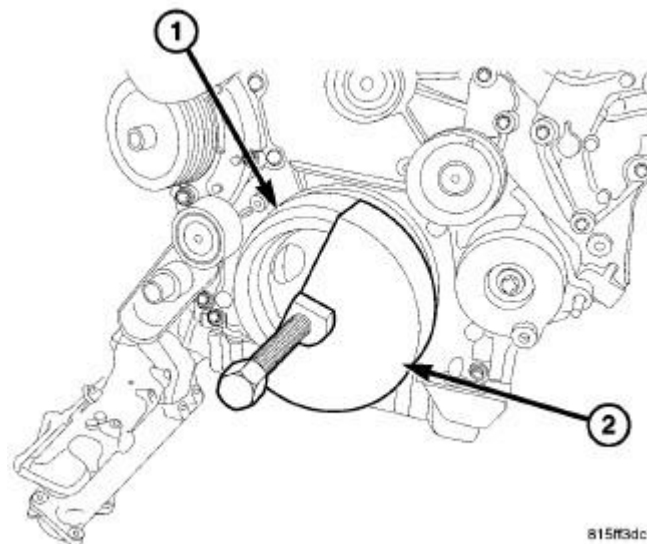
VIBRATION DAMPER AND SPECIAL TOOL # 9944
